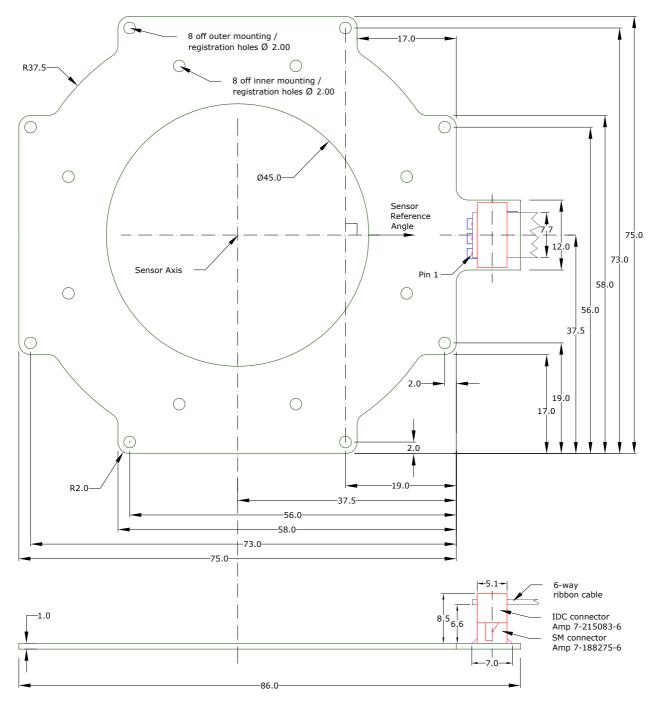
sensor board part number 013-0015 mated with connector 013-6001
